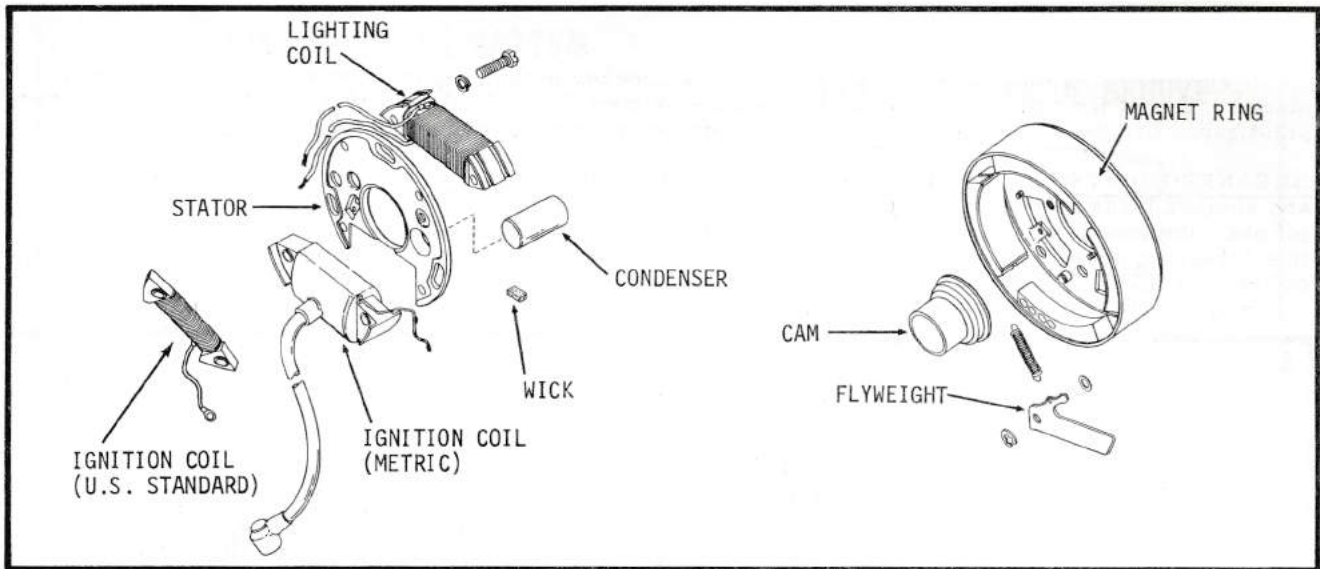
EXPLODED VIEW: IGNITION STATOR, SPARK ADVANCE MECHANISM COMPONENTS
